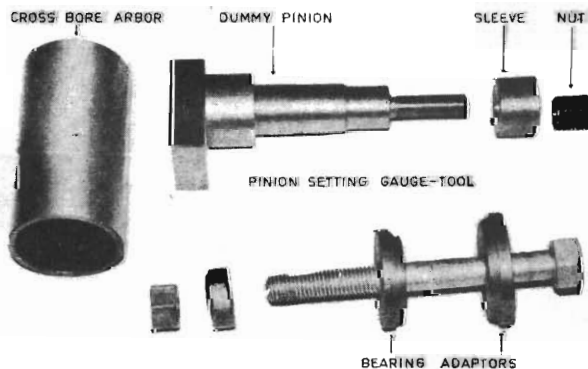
Pinion setting gauge (Tool E3C10E)
